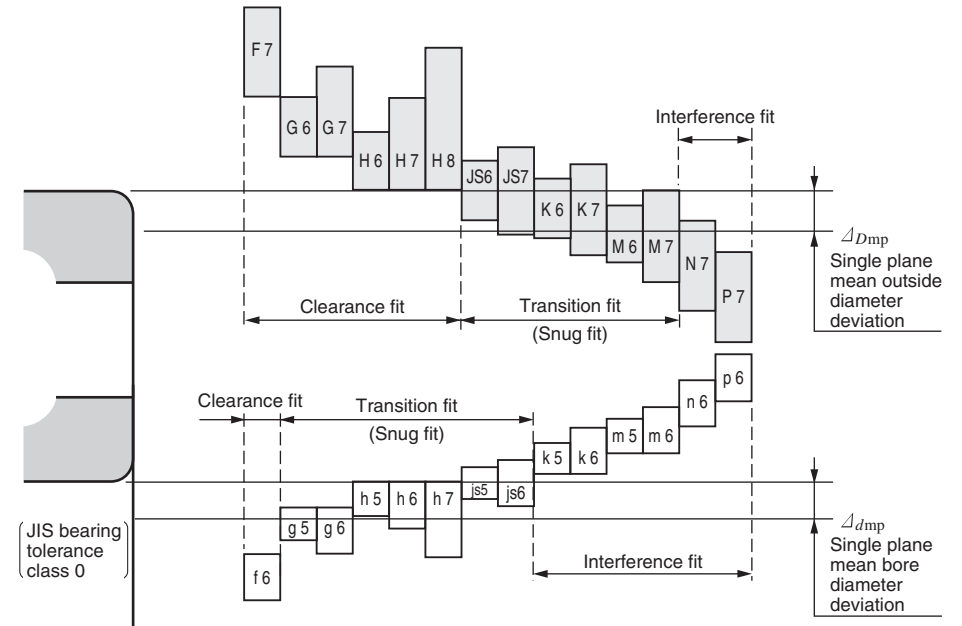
Relationship between tolerances for shaft/housing bore diameters and fits (bearings of class 0 tolerance)
